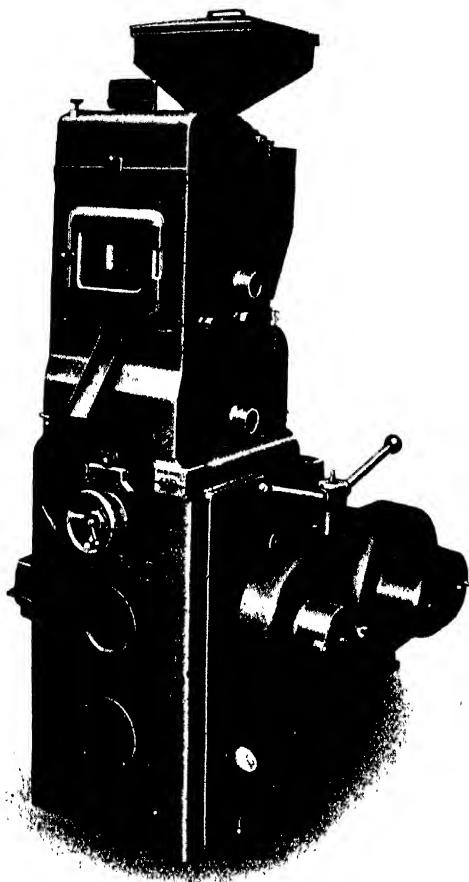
PREFORMING MACHINE FOR TABLETS UP TO $1\frac{1}{2}$ IN.
